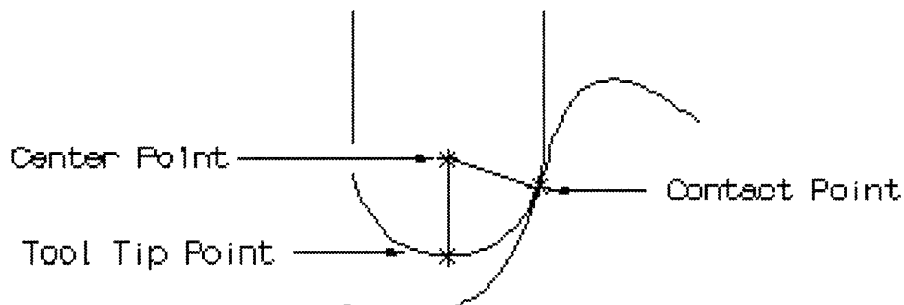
The analytic geometry involved in the calculation of a tool tip point from a contact point, in 3 axis machining using a ball end mill.
